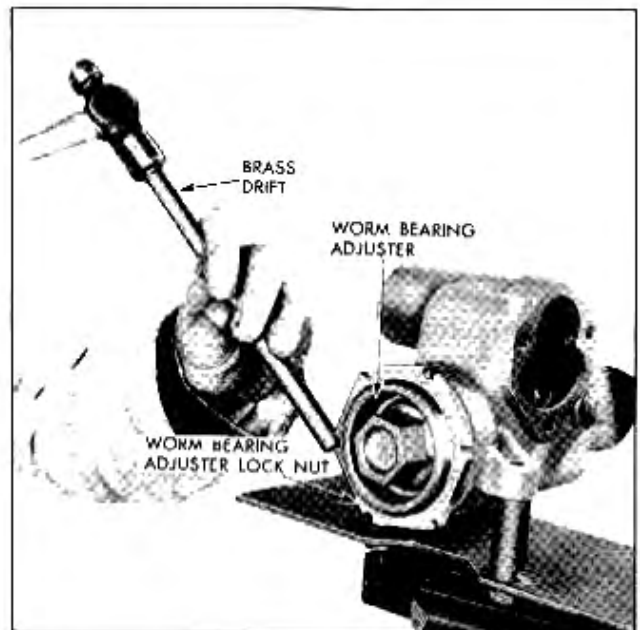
Loosening Worm Bearing Adjuster Lock Nut
